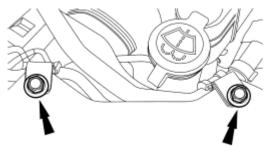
Locating Power Steering Cooler Tube Courtesy of FORD MOTOR CO.
